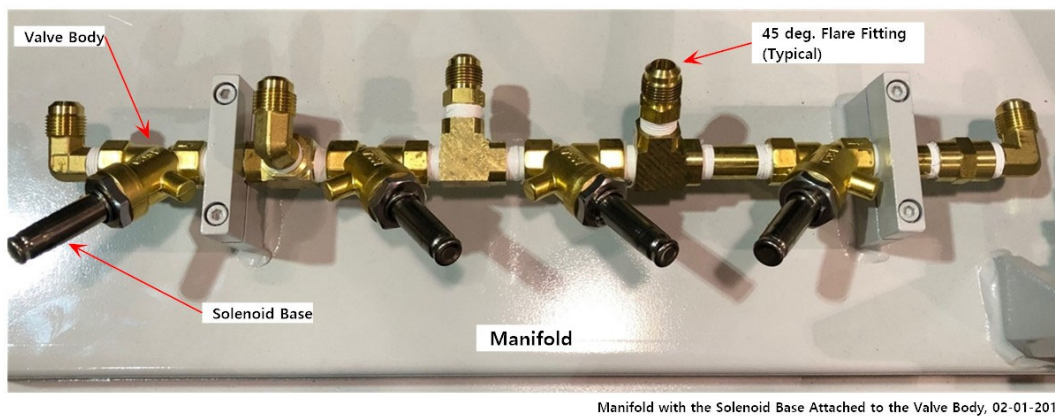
Manifold with the Solenoids Removed, showing the Solenoid Bases
